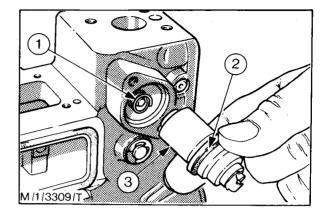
Removing the Excess Fuel Solenoid (Dover)
